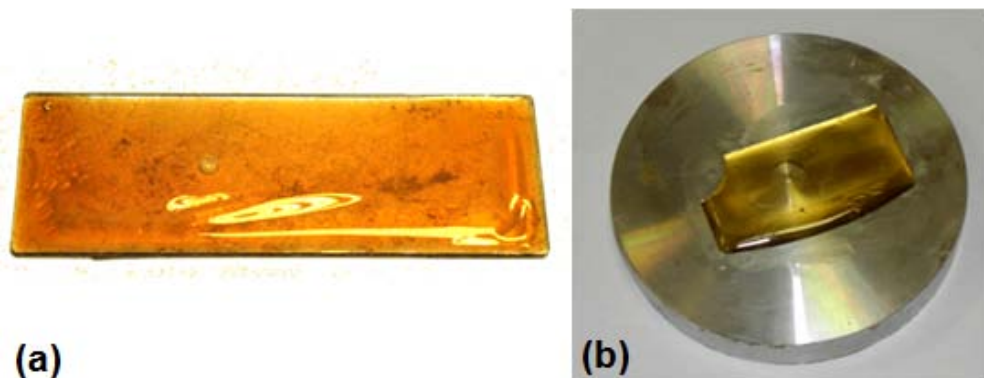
(a) Creases are evident at the borders of the cured SU8 layer on a glass plate. (b) A SU8-coated glass plate is secured on a metal disk to enable it to be held by the vacuum chuck on the diamond turning machine.
